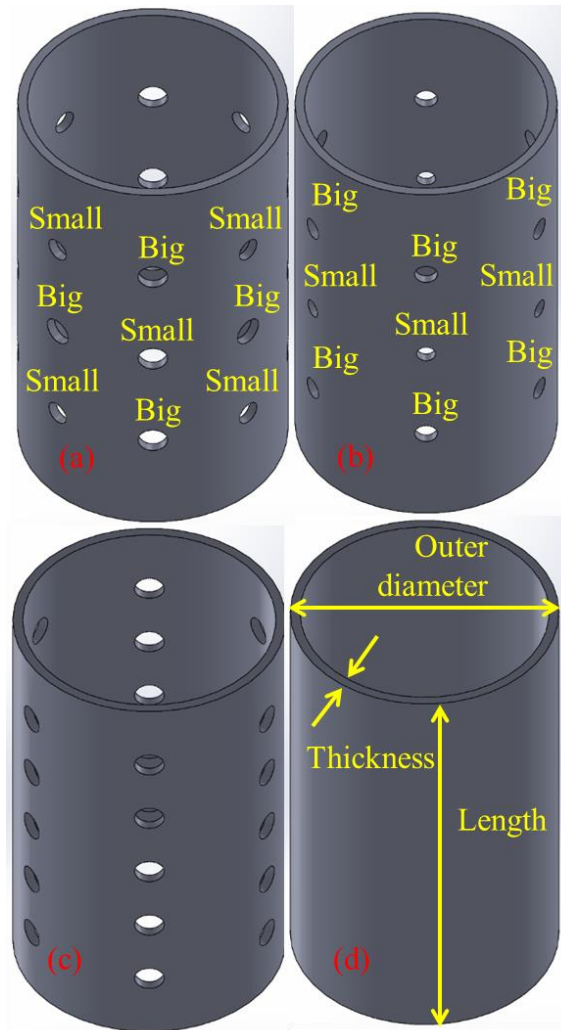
(a): Perforated tube with irregular non-size holes, (b): Perforated tube with regular non-size holes, (c): Perforated tube with same-size holes, (d): Solid tube without holes
